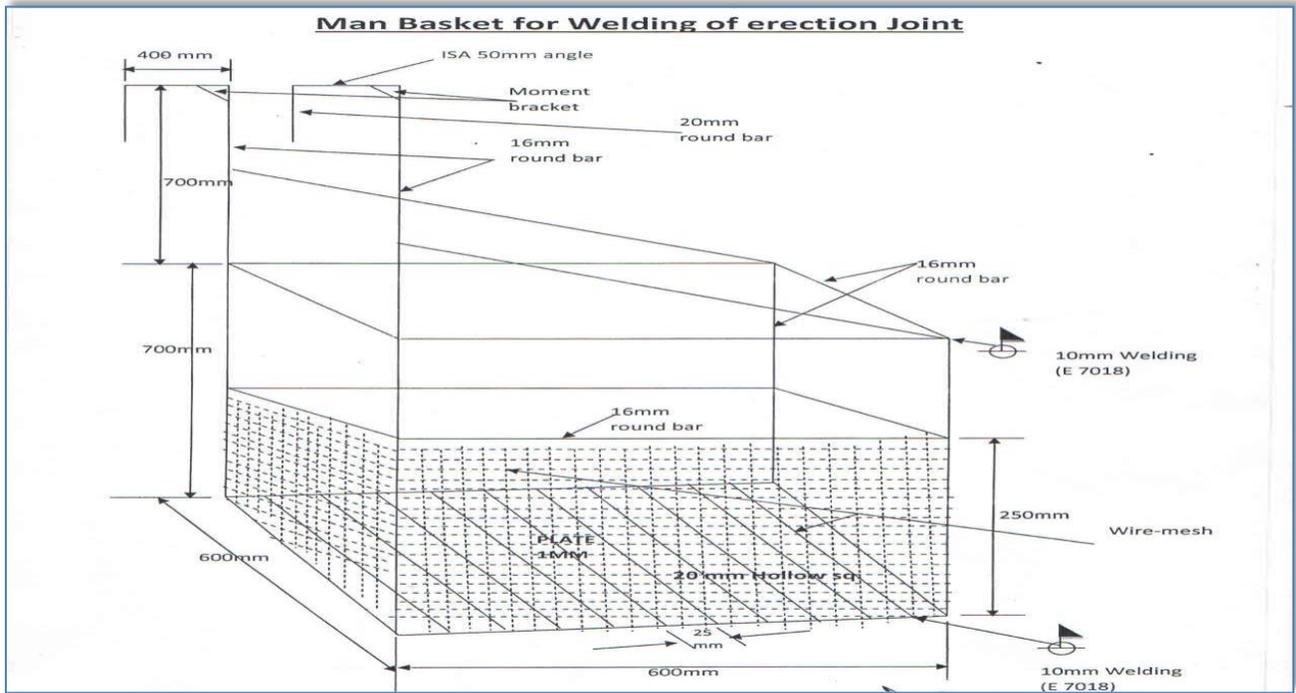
Man Basket for Welding Erection Joint
